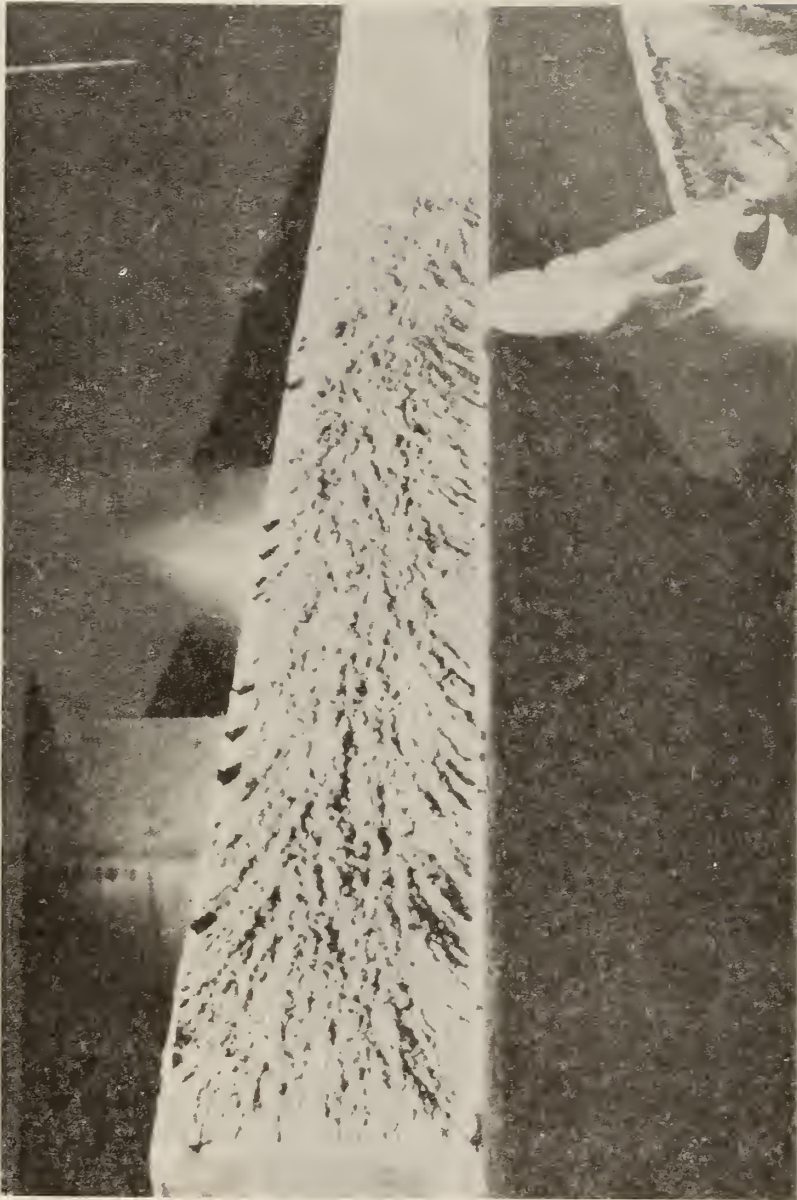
Brittle fracture surface showing classic herringbone pattern and small shear lips.
